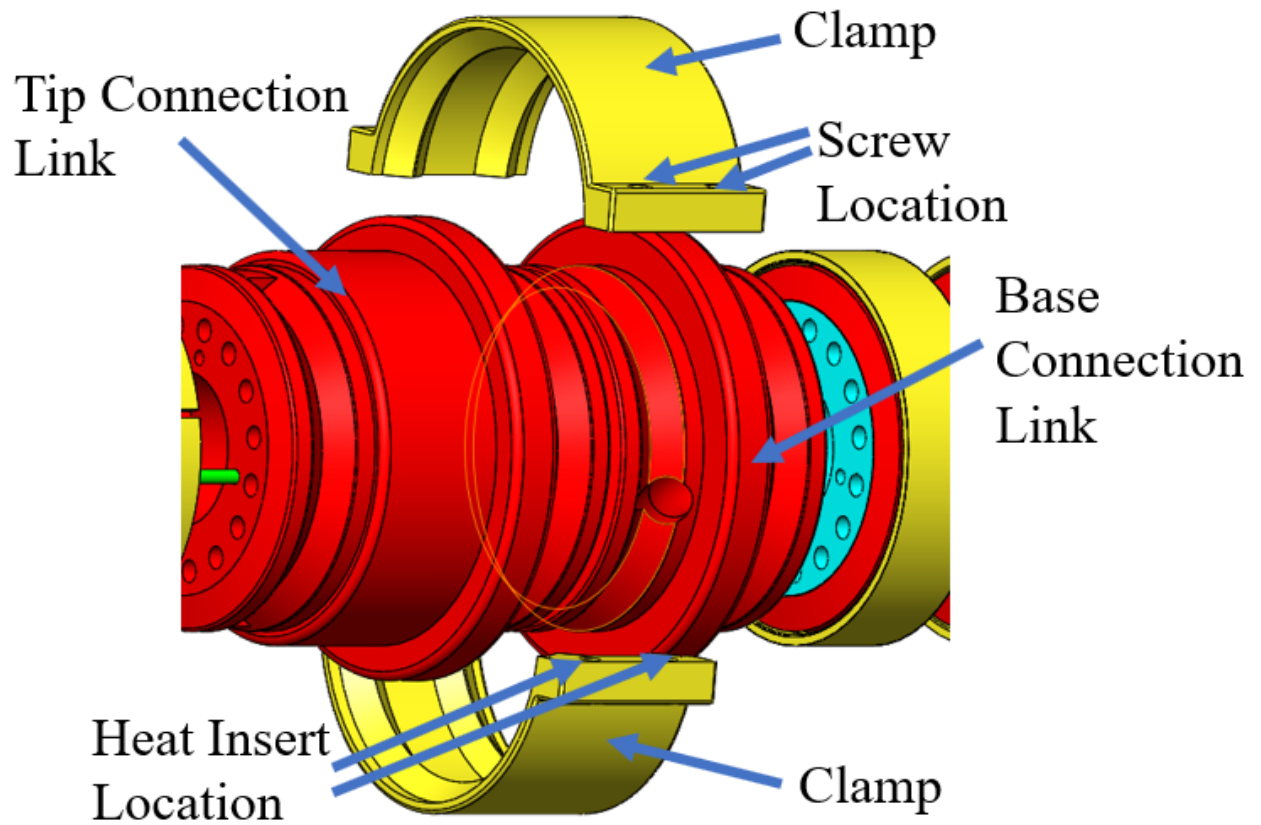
Exploded View of Connecting Mechanism for Modular Design
